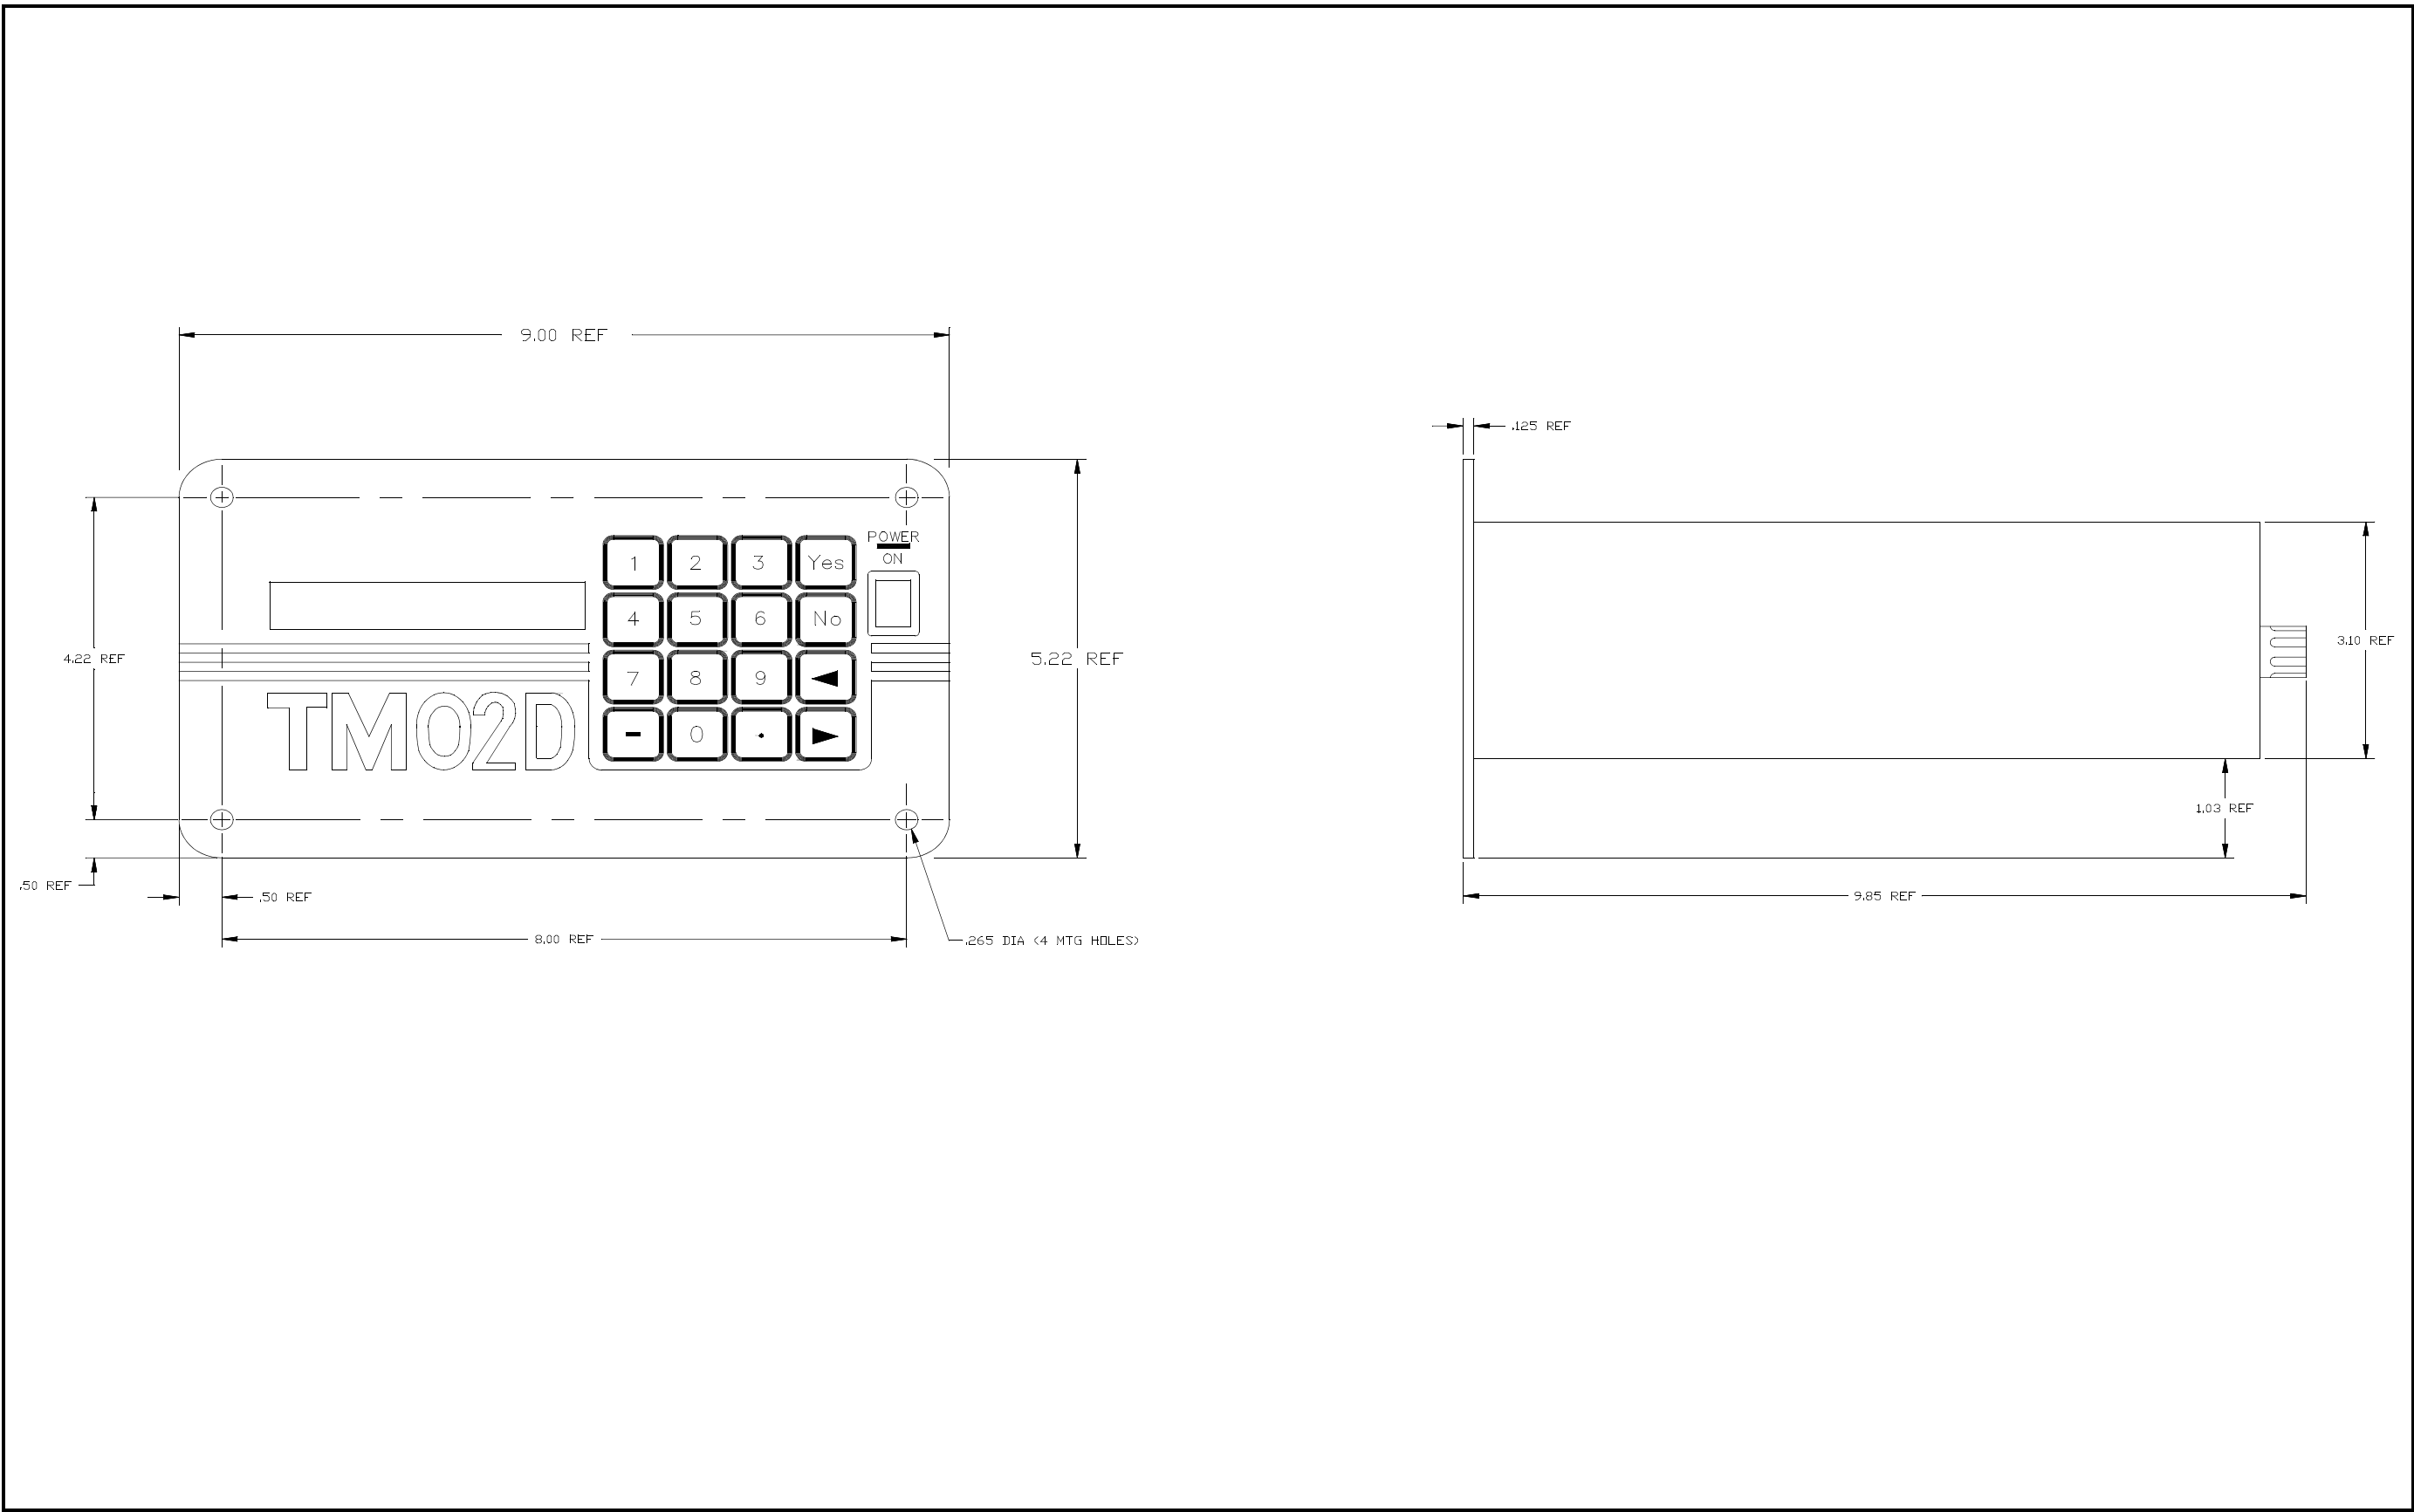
Panel Mount Outline and Installation (Dwg. #712-222)
